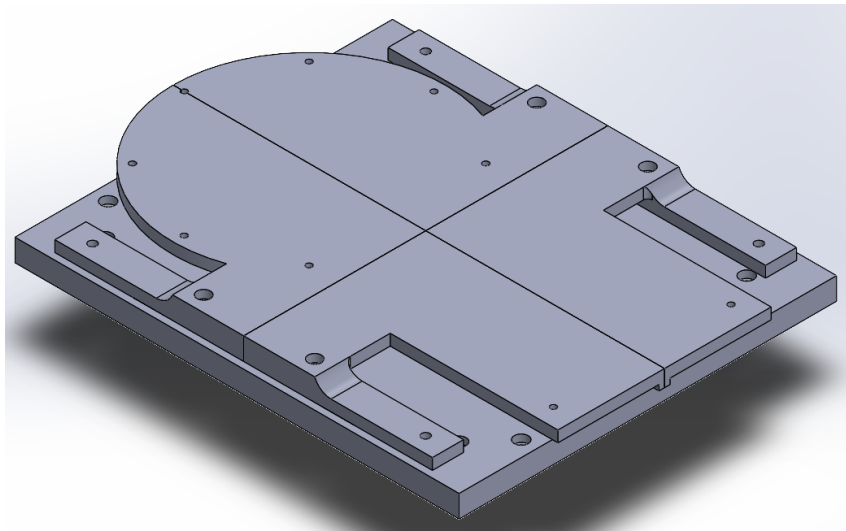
Top Plate and Robotic Arm Mount in CAD
